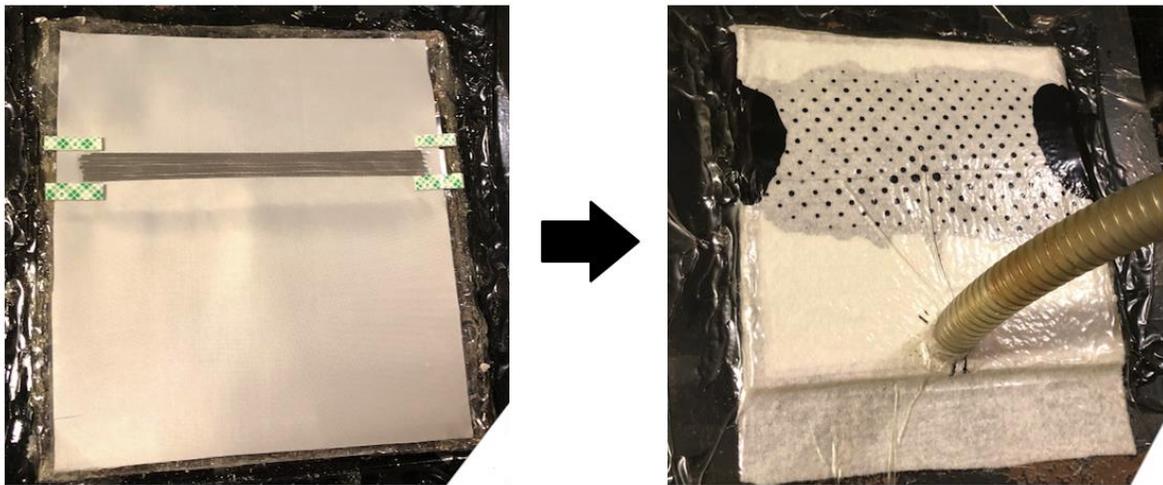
Vacuum assisted hand lay-up technique as guided by the ASTM D5687
